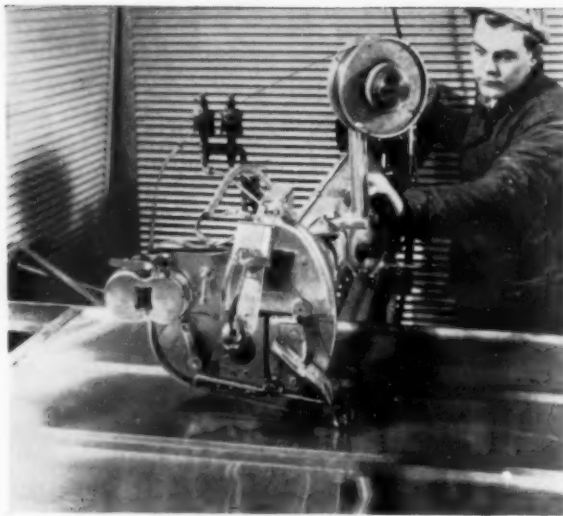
A special set-up is used to stitch 8x8 ft aluminum sheets to structural members in fabricating door assemblies.
